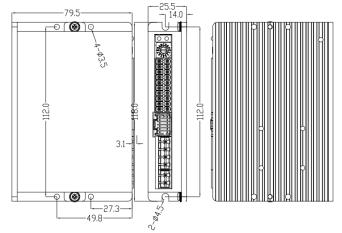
(A) installation method of driver ELD2-RS7005/ ELD2-RS7010
